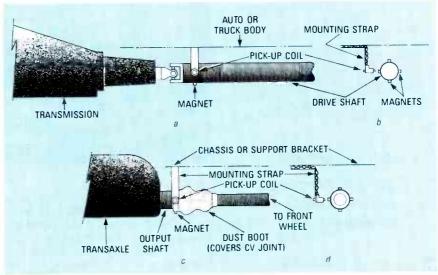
MAGNET AND PICKUP-COIL MOUNTING METHODS: For a car with a transmission and driveshaft, mount the magnets and pickup coil as shown in a and b, respectively. For a car with frontwheel drive, mount those parts as shown in c and d.
